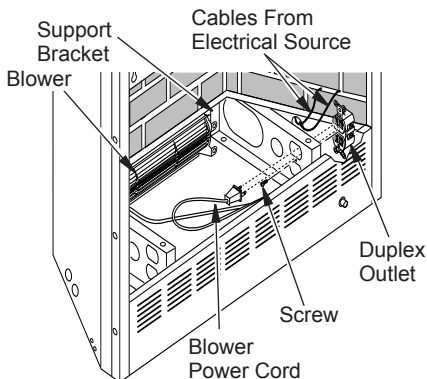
Routing Blower Accessory Power Cord for Built-In Installation
